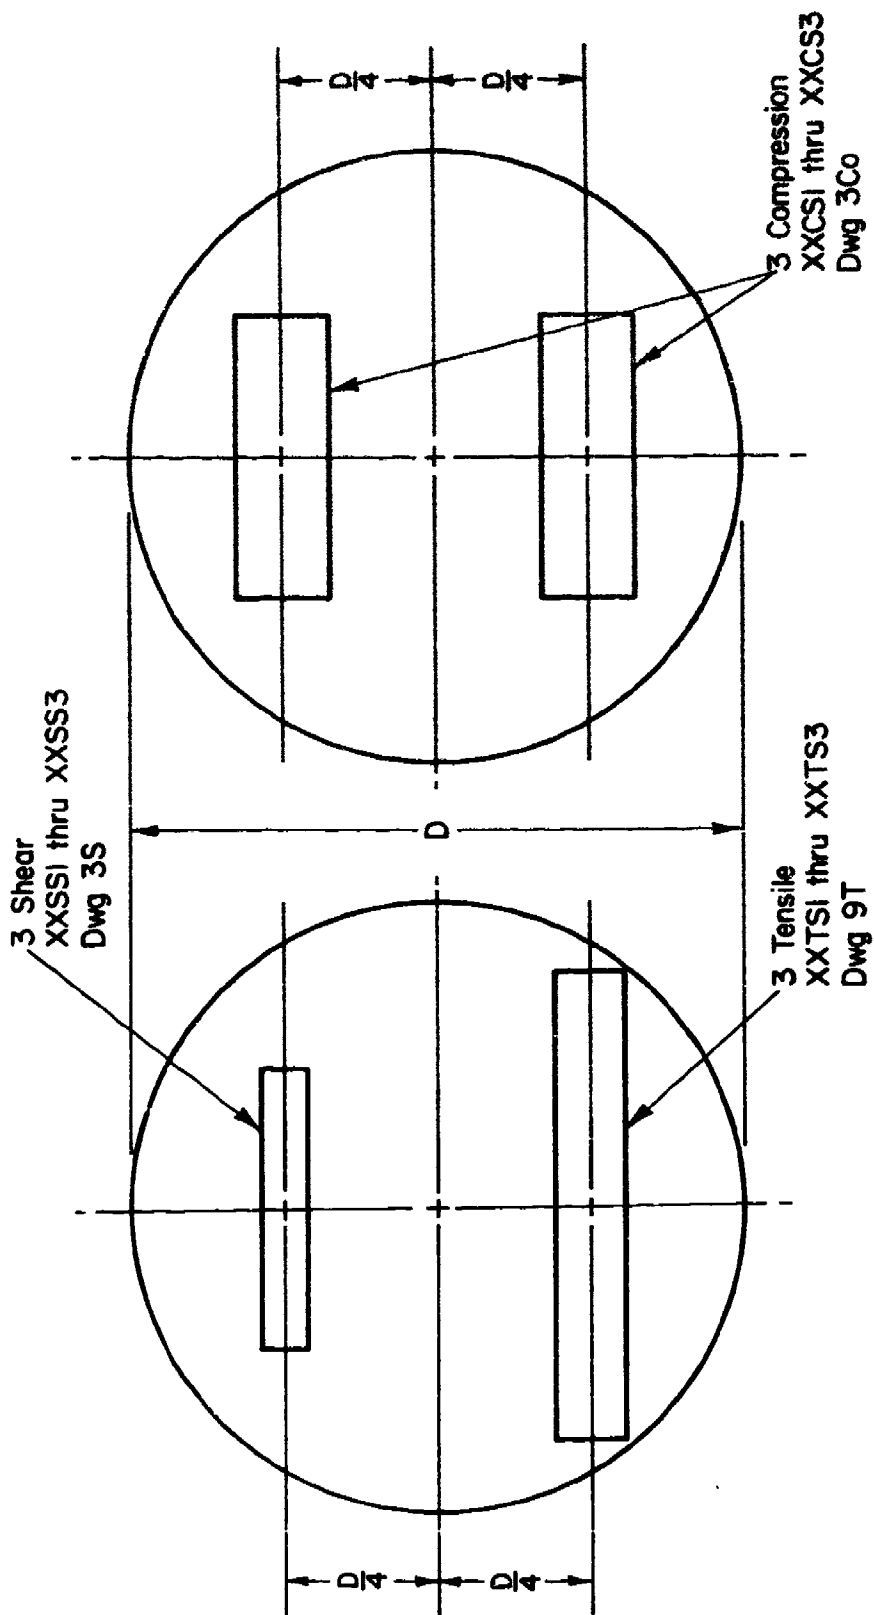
Location of short transverse tensile, compression, and shear specimens for Inconel 625 and Inconel 718 bar--3-1/4-, 3-1/2-, 3-3/4-, and 4-inch diameter.
